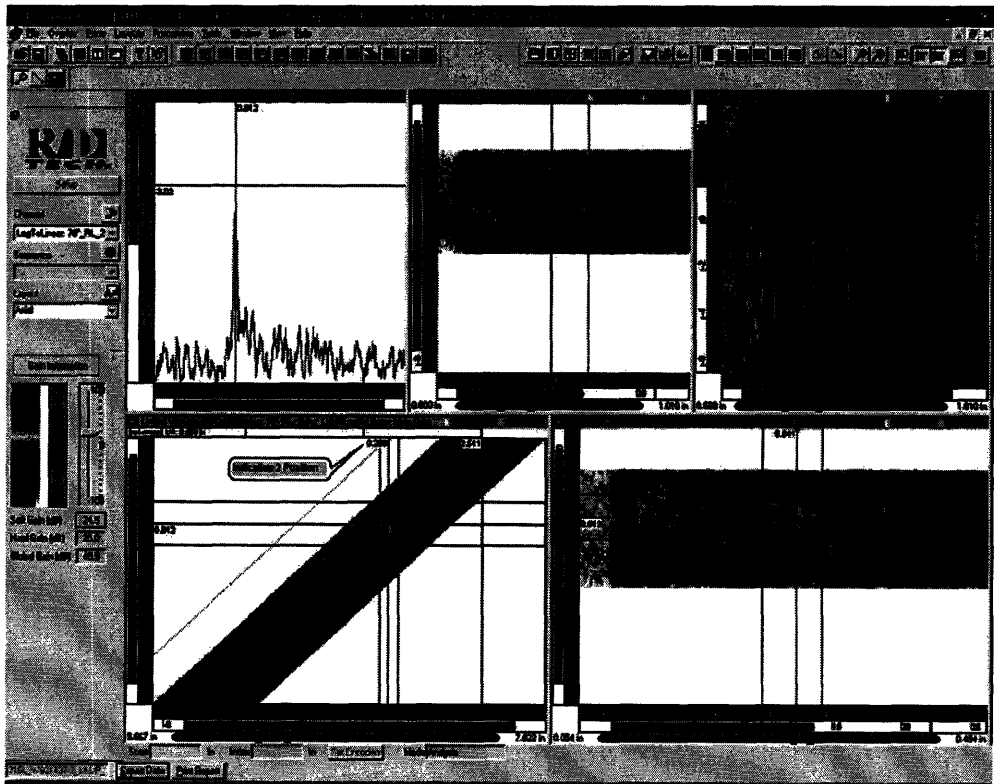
Indication 2 Position: .27" from Weld Centerline
